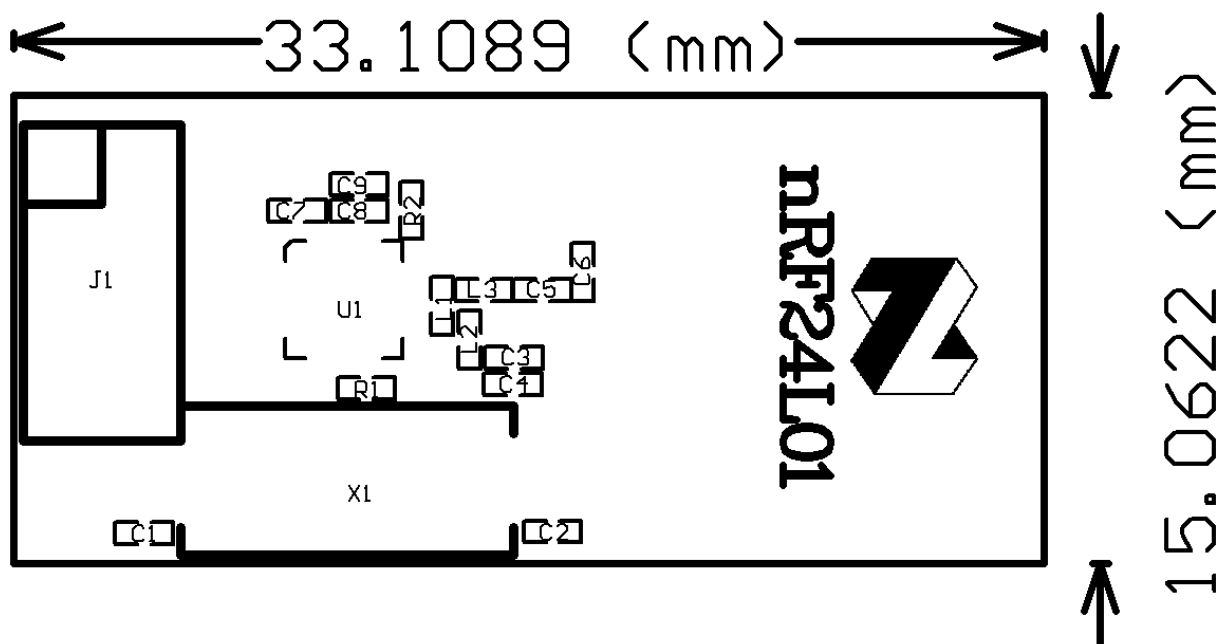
Top overlay (nRF24L01 RF layout with single ended connection to PCB antenna and 0402 size passive components)
